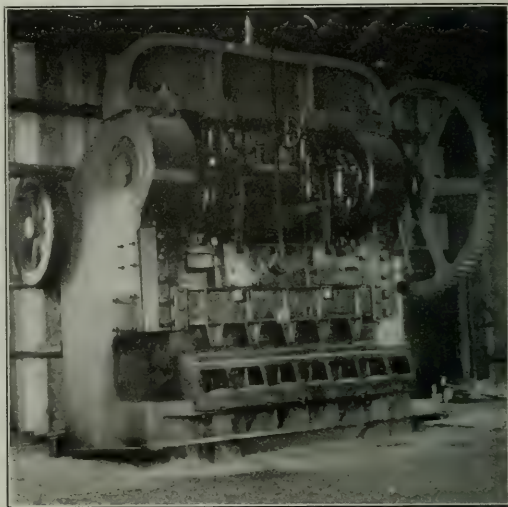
Large Shears for Cutting Heavy Rods and Bars for Re-rolling.
